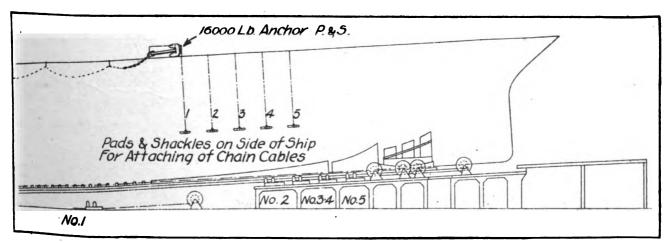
SIDE ELEVATION OF DETAILS SHOWN IN FIG. 4
